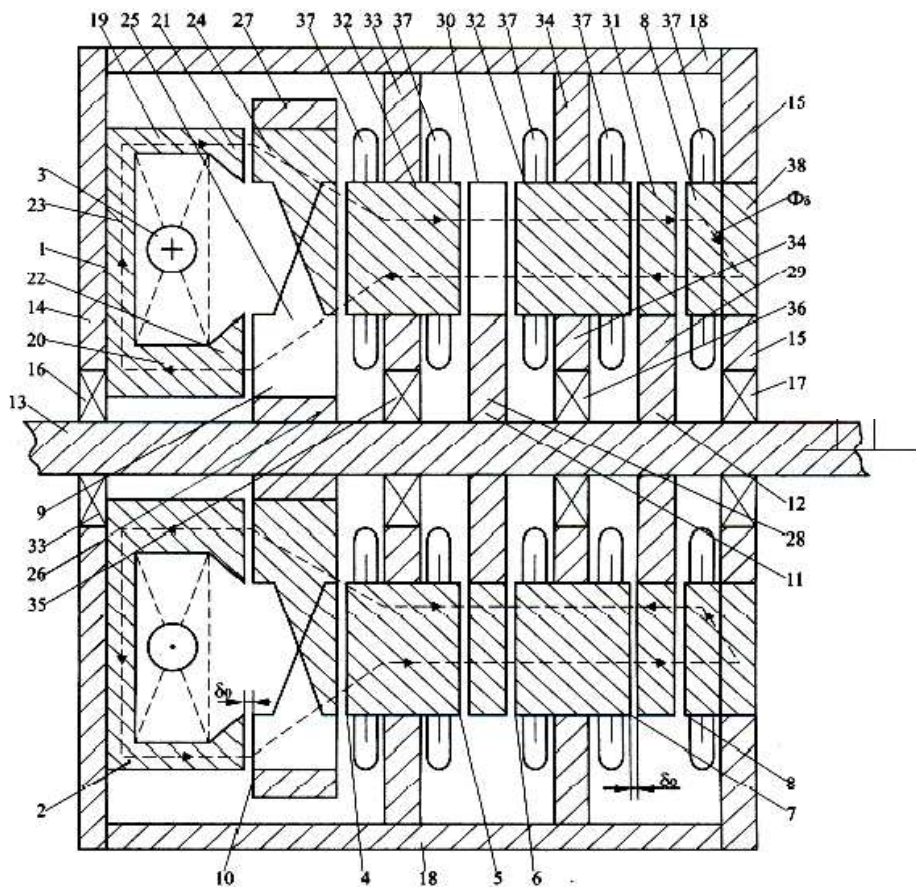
A brushless synchronous machine with a disc-type rotor
